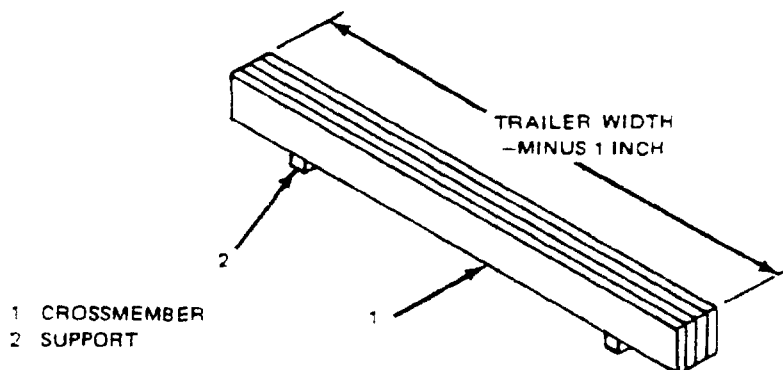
REAR BLOCKING ASSEMBLY (SOLID FILL)
